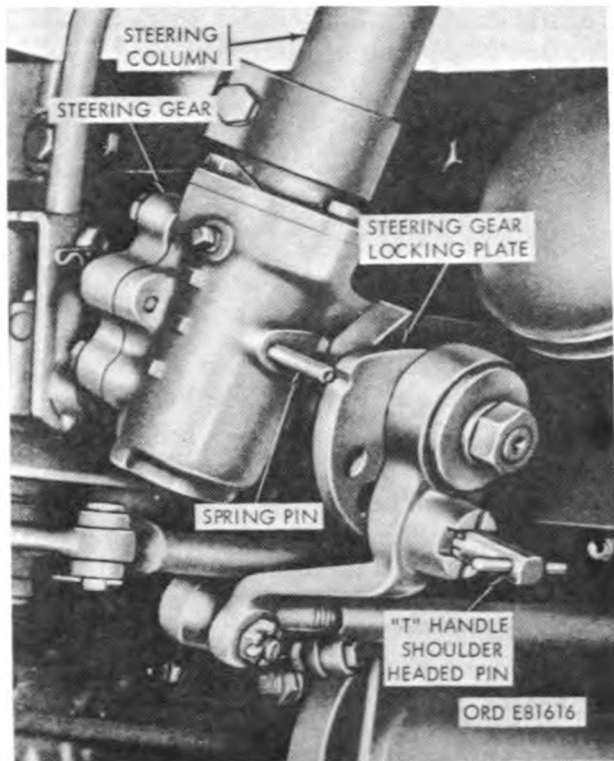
Location of steering gear locking plate and "T" handle shoulder headed pin.
